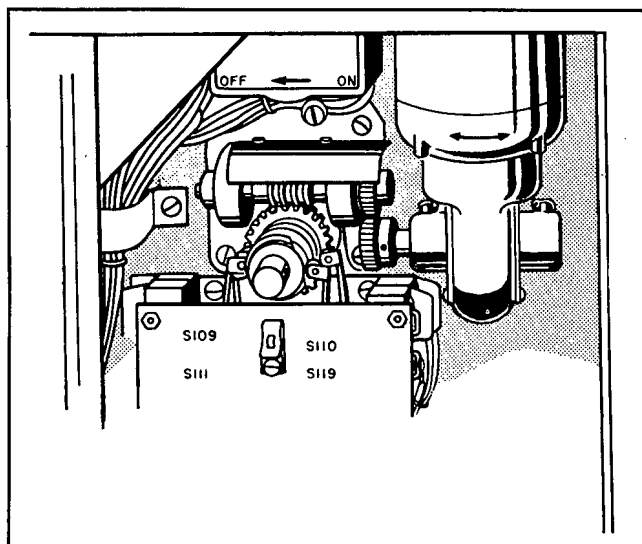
Limit Switch and Cam Assembly in Transceiver
